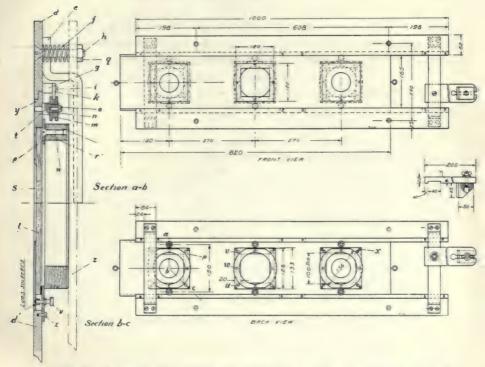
Construction drawings for stimulus adapter. Dimensions in millimeters. Front view. Back view; p, brass plate framing the aperture in aluminum plate y; u, head of one of the two screws which serves to hold opal glass plate firmly against standard brass stimulus plate (the other screw is in the corner diagonally opposite); v, one of the two screws which serves to hold standard stimulus plate in position (the other is in the corner diagonally opposite); w, screws attaching hard rubber ring to p; a-b, and b-c indicating sections. Section a-b; d, d', metal straps with rabbeted edge for aluminum plate y; e, strap connecting d and d'; f, steel spring on h, bolt tying d to z; g, brass collar for screw, i, which attaches brass track, k, to d; m, n, o, t, parts of brass roller which enables y to move on track; p, brass plate framing aperture in y; r, hard rubber ring about aperture; w, screw attaching r to p; s, standard brass stimulus plate. Section b-c; 1, plate of flashed opal glass.
